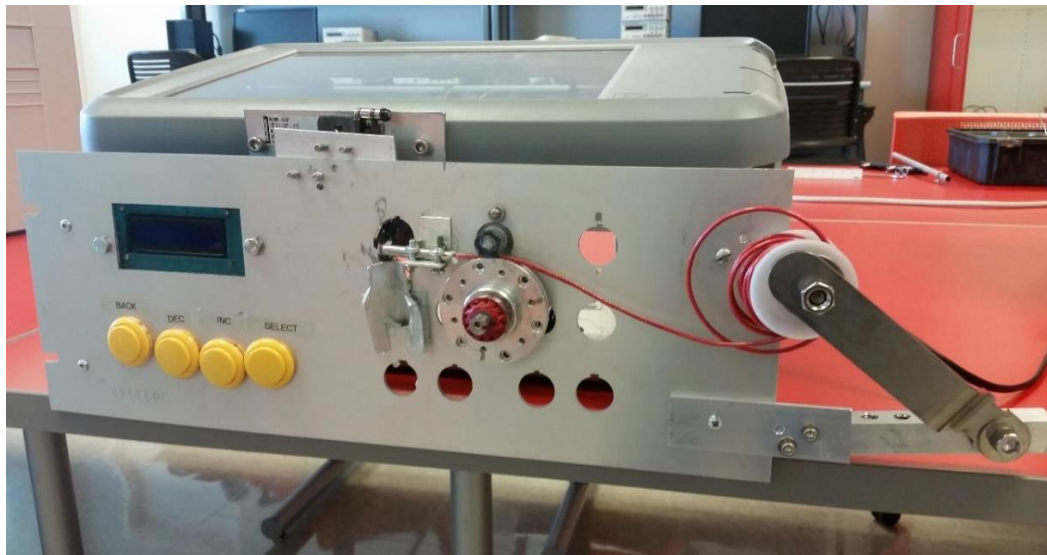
Industrial wire cutting machine with the final wire feeding mechanism.
